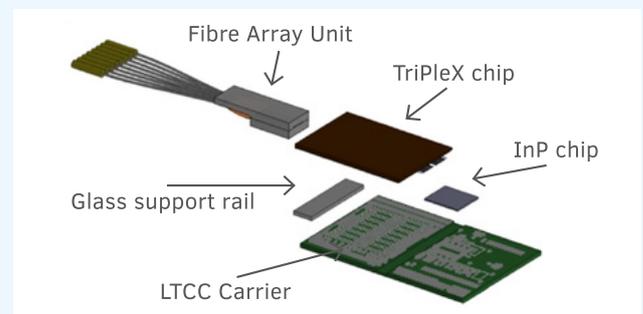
Exploded drawing of assembly showing the piece parts required (from left to right) Fibre array unit, TriPleX chip (backside view), glass rail, InP chip (TU/e test chip, backside view), LTCC carrier (top view).
